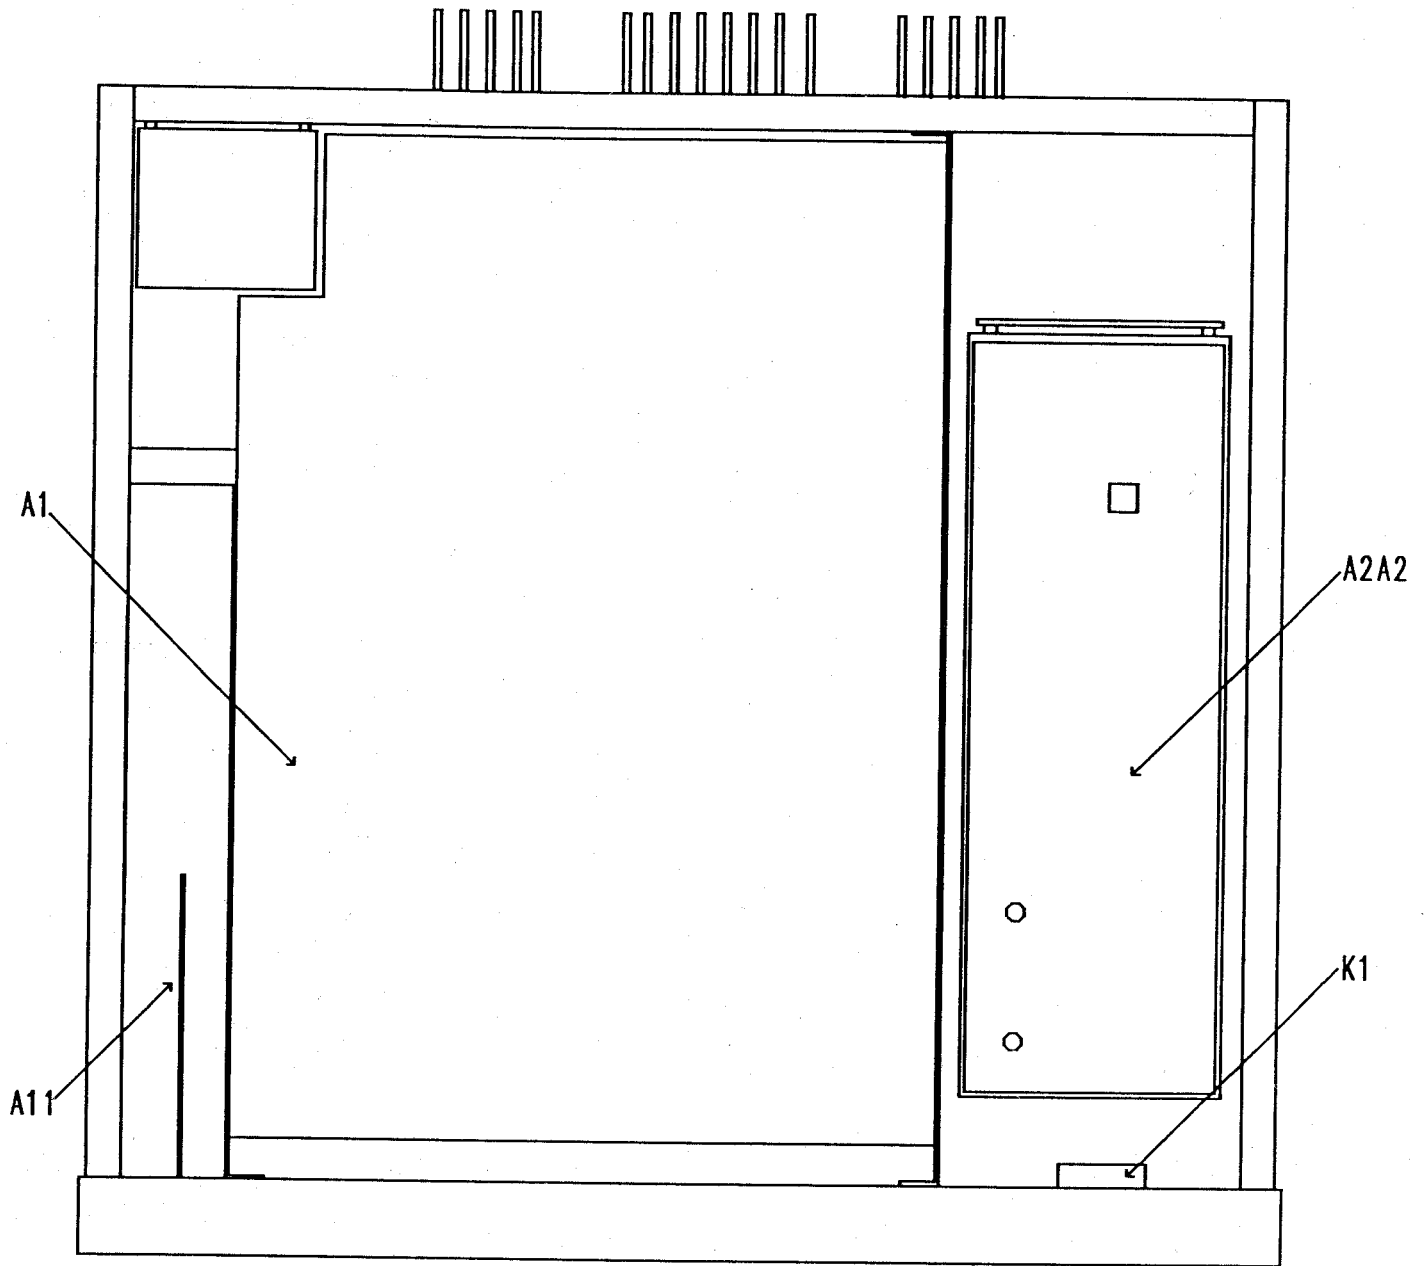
MAJOR ASSEMBLY LOCATION, BOTTOM VIEW.
